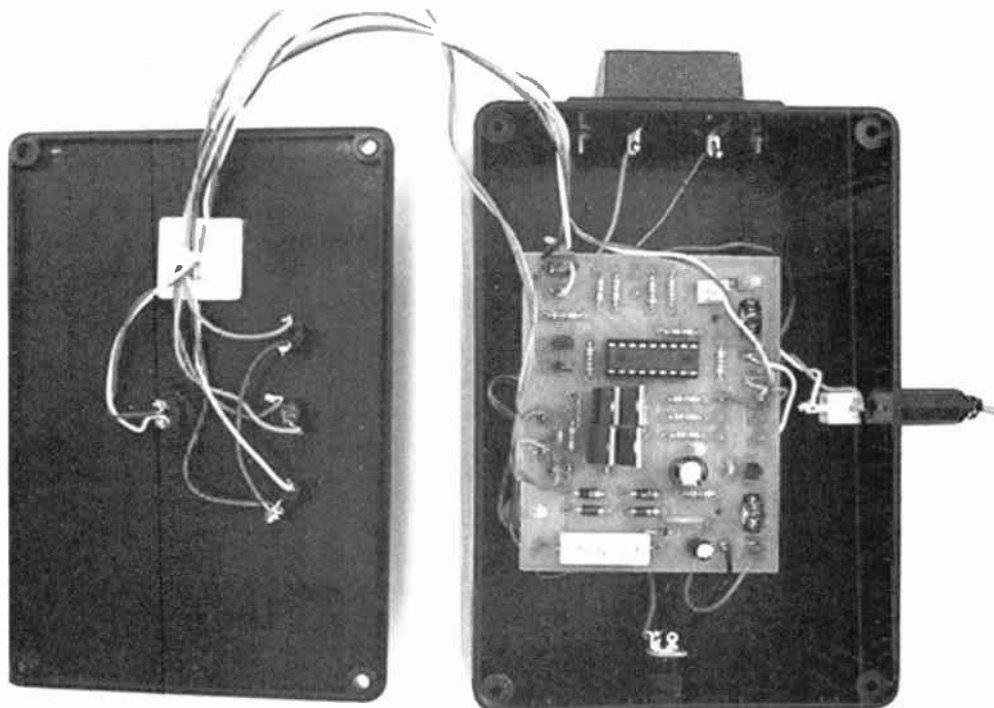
Internal view of the completed curtain or blind winder electronics assembly.
